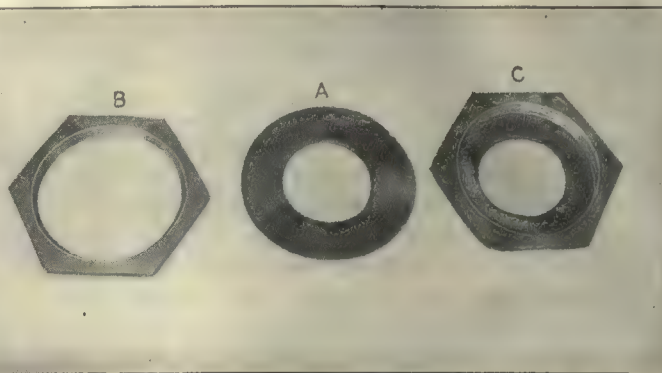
WELDED AXLE-COUPLING NUT
